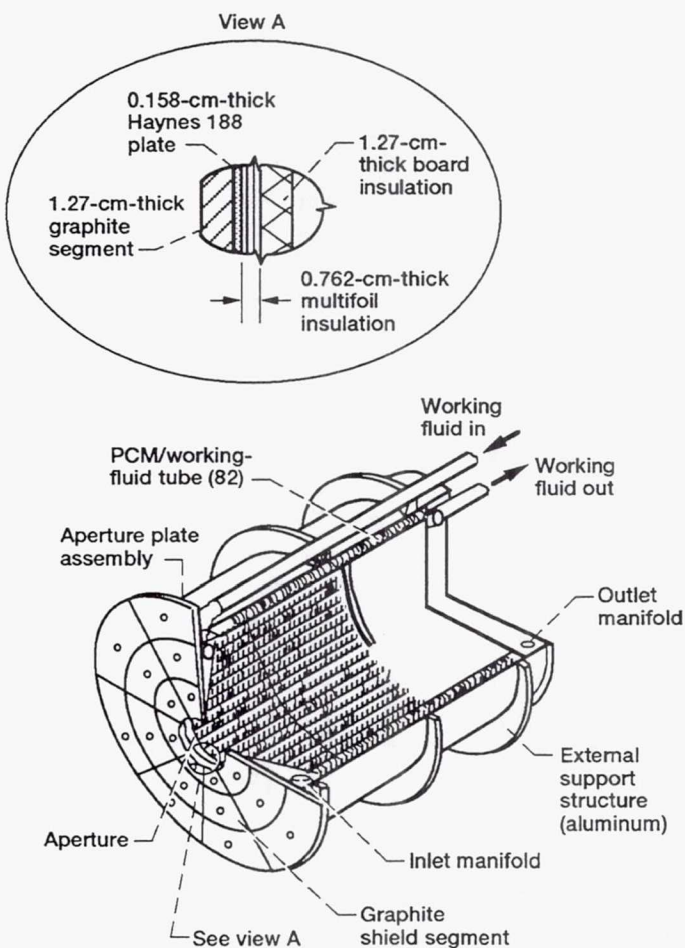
Solar receiver with aperture plate assembly. Overall dimensions: diameter, 1.86 m; length, 2.99 m.
